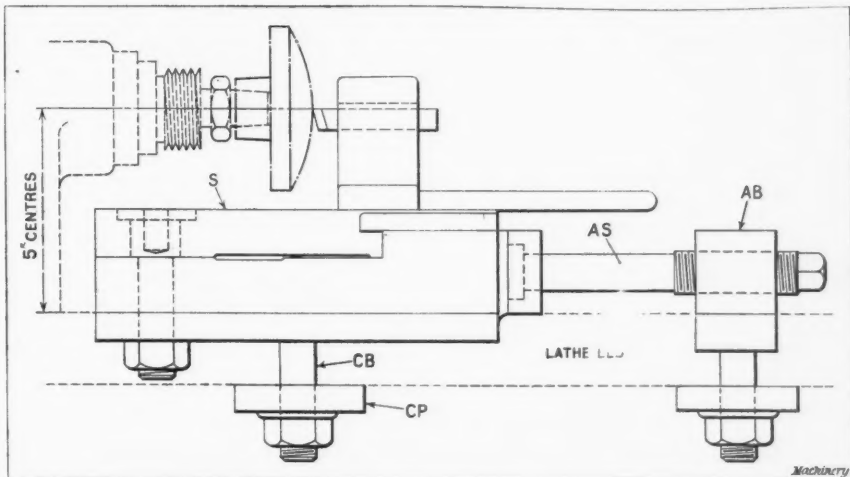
Turning Attachment Secured Directly on Bed of Lathe
